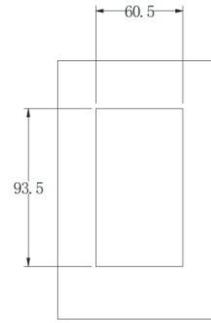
External Keyboard with Tray Installation Cutout Dimensions
